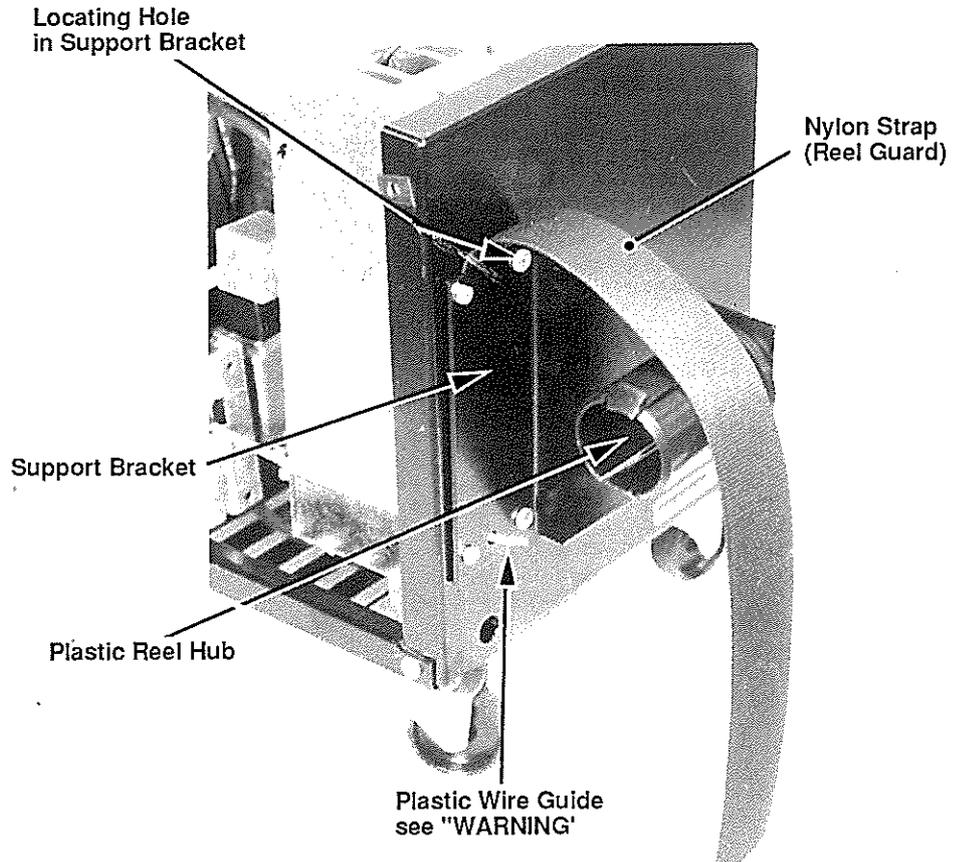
Fig. B. - Wire Reel Bracket and Reel Guard Fitting
